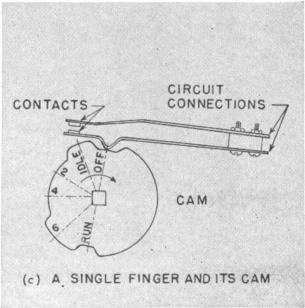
A cam-operated switch, showing some of its parts and how it works
